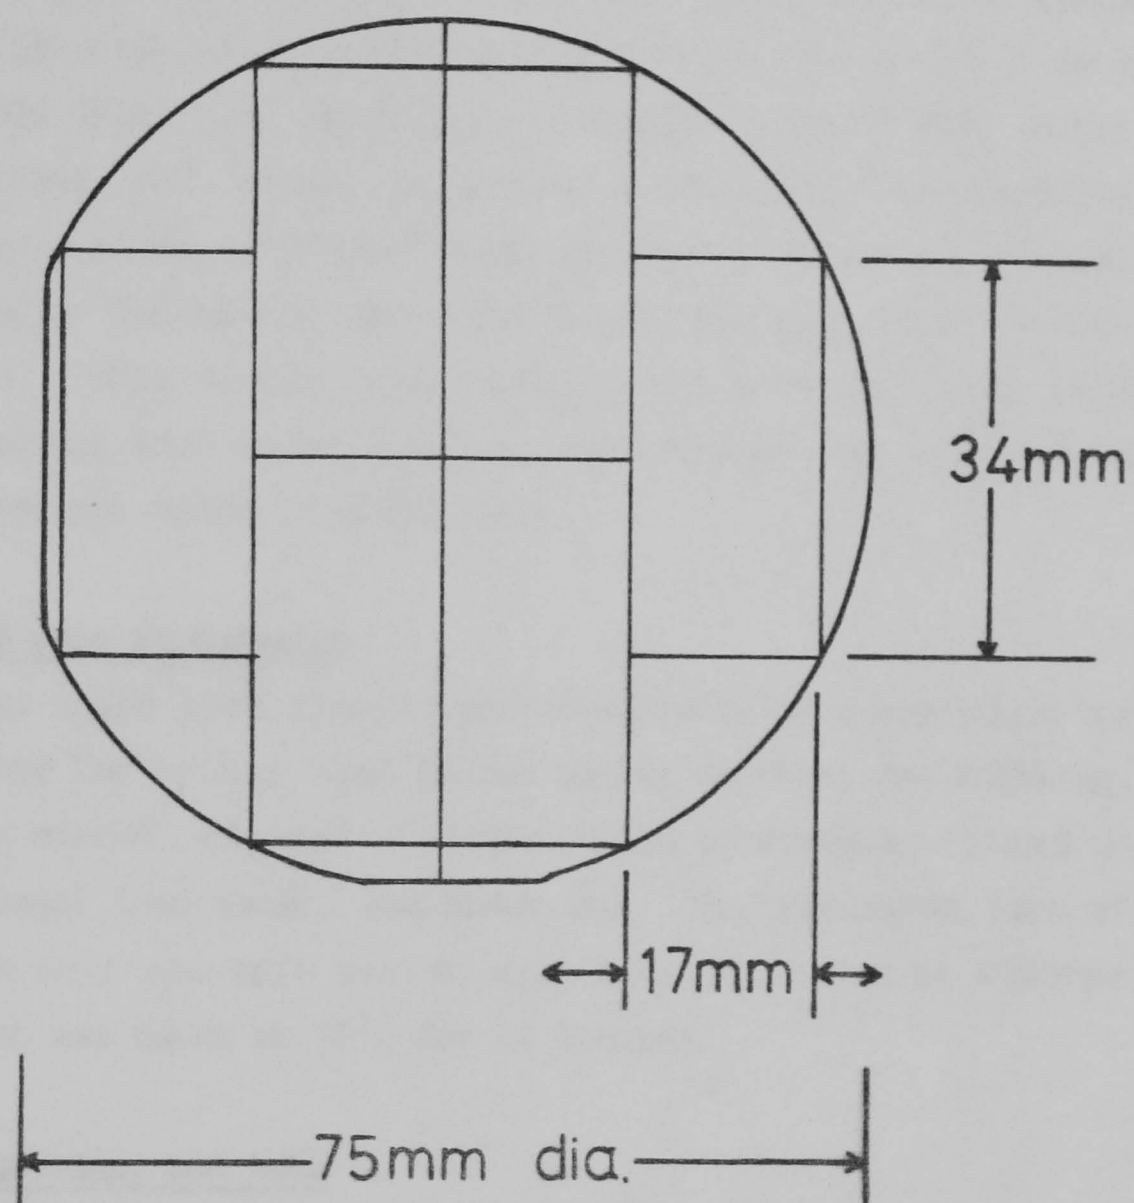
Sectioning a 75mm wafer into six chips for membrane fabrication.
